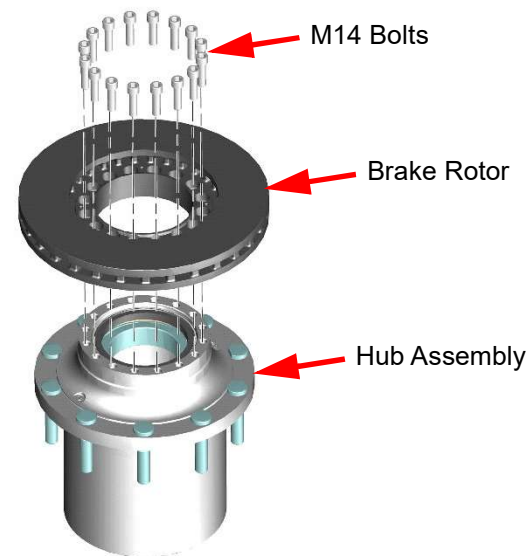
Installing Brake Rotor onto Hub Assembly
